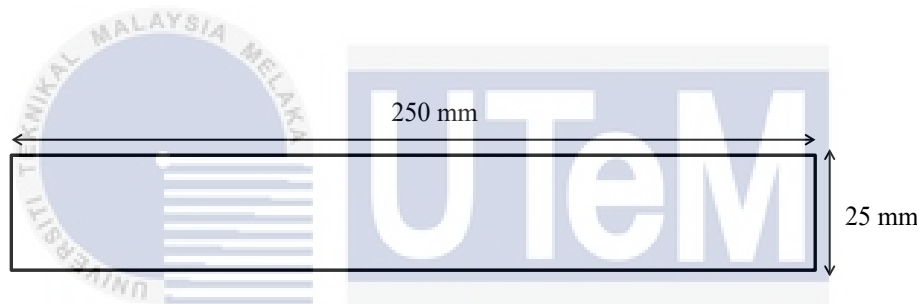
The ASTM (D3039)-based dimensions of the tensile test specimen
